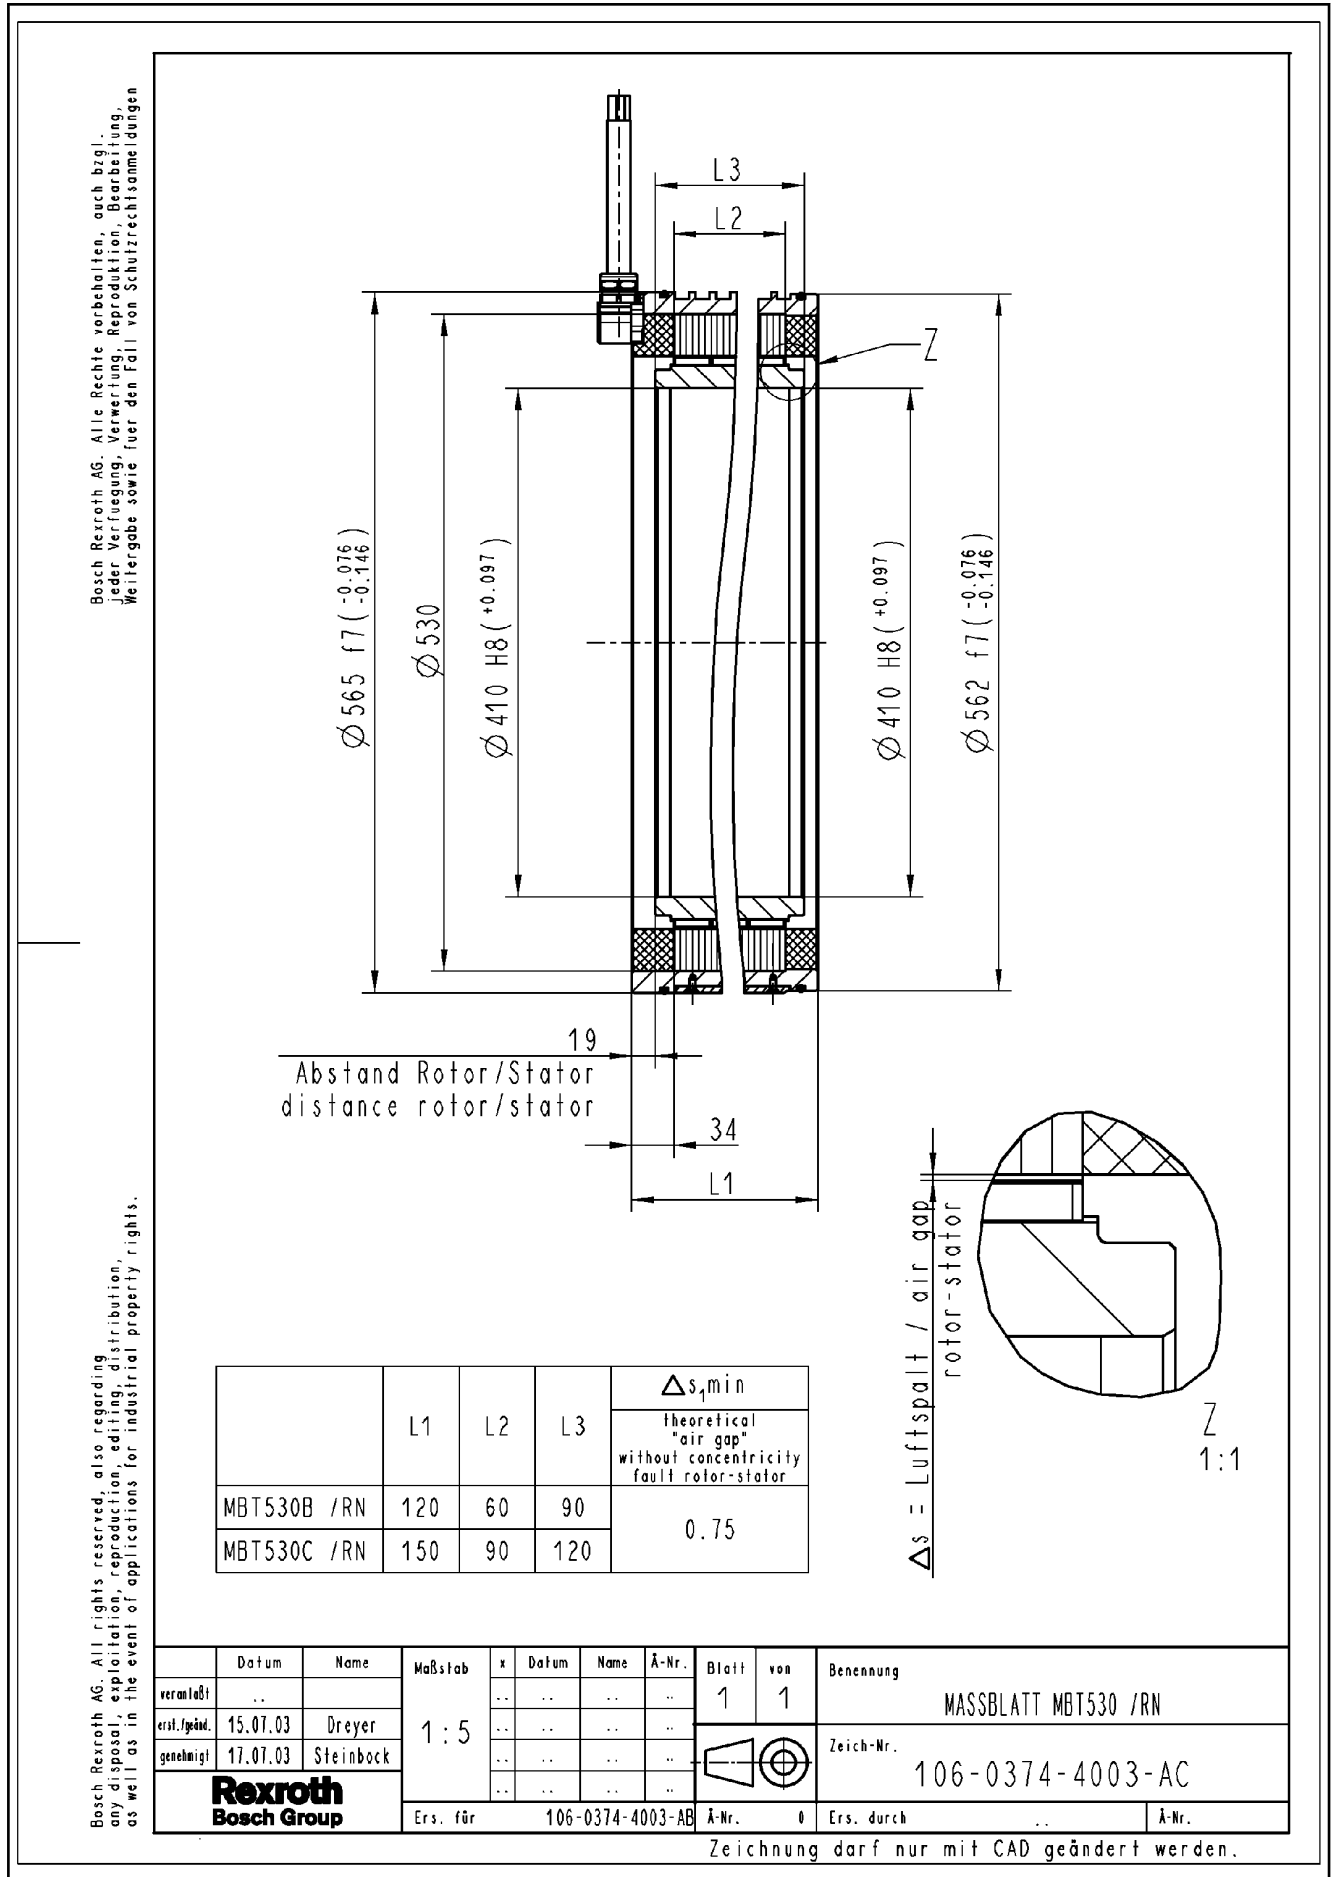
Dimension sheet for frame size 530, electrical connection "RN"
